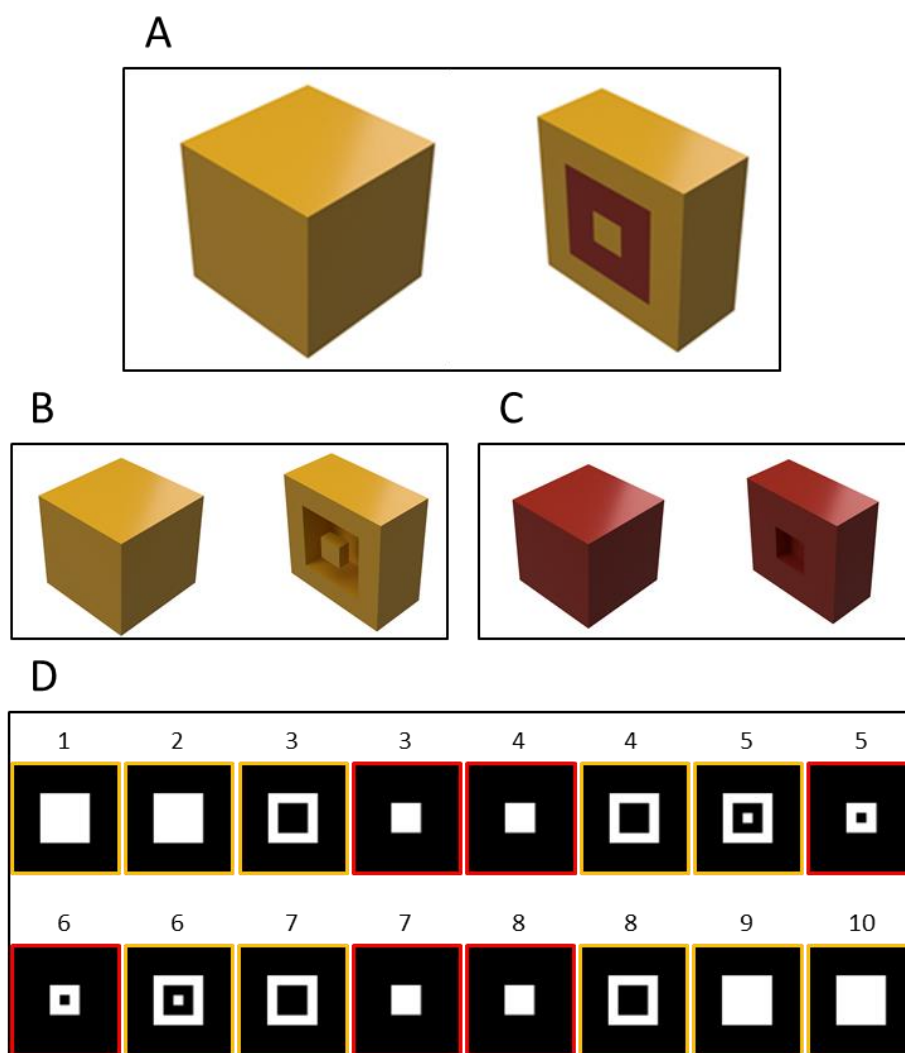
CAD design of 1 mm² multimaterial cube and its cross-sectional view (A), separate CAD designs and their cross sectional views for non-encapsulated (B) and encapsulated (C) parts and the respective masks generated, placed in order and colour coded to distinguish between the different layers and whether encapsulated (red) or non-encapsulated resin should be used (D)
